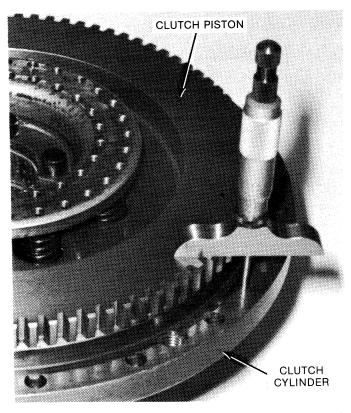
Measuring from Rear of Clutch Piston to Flange on Clutch Cylinder.
